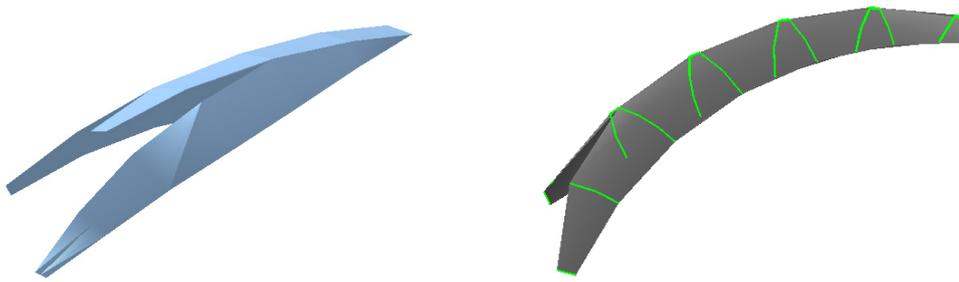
Three-dimensional model of undeformed chips during complete machining in one pass in different views
